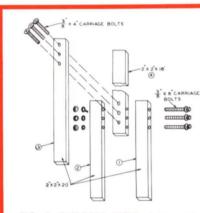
EXPLODED VIEW of the middle joint between the legs and top section (Parts 1, 2, 3, and 4). Bolt holes are spaced 15 inches apart. FIG. 3. MIDDLE JOINT assembled. Use washers under all bolt heads and nuts.
